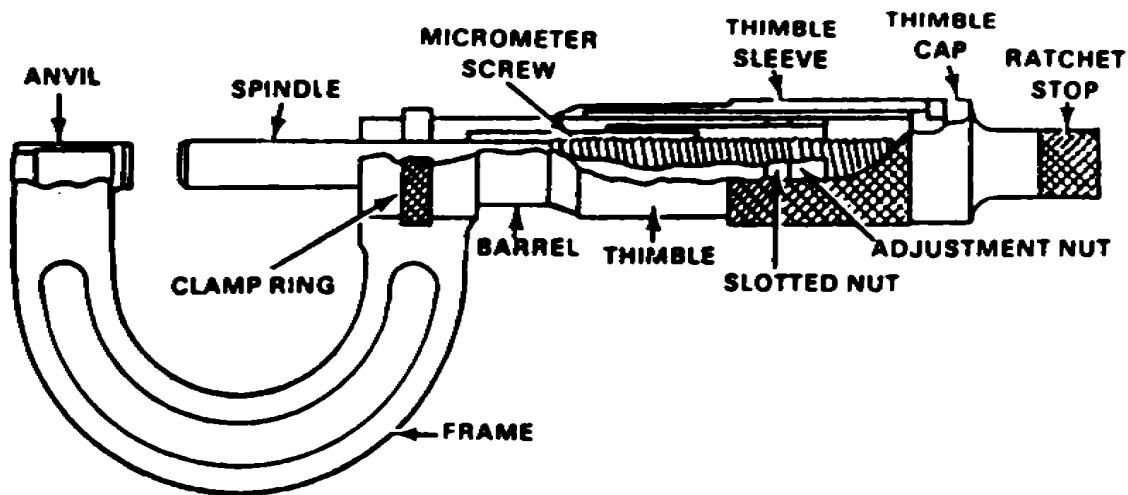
MICROMETER CALIPER, CUTAWAY VIEW
